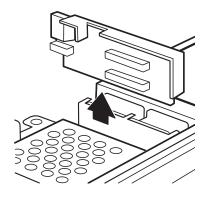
Lifting the SAS IF Assembly From the Chassis
